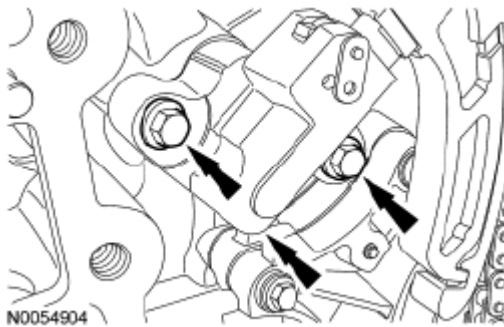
Locating Primary Timing Chain Tensioner Bolts
